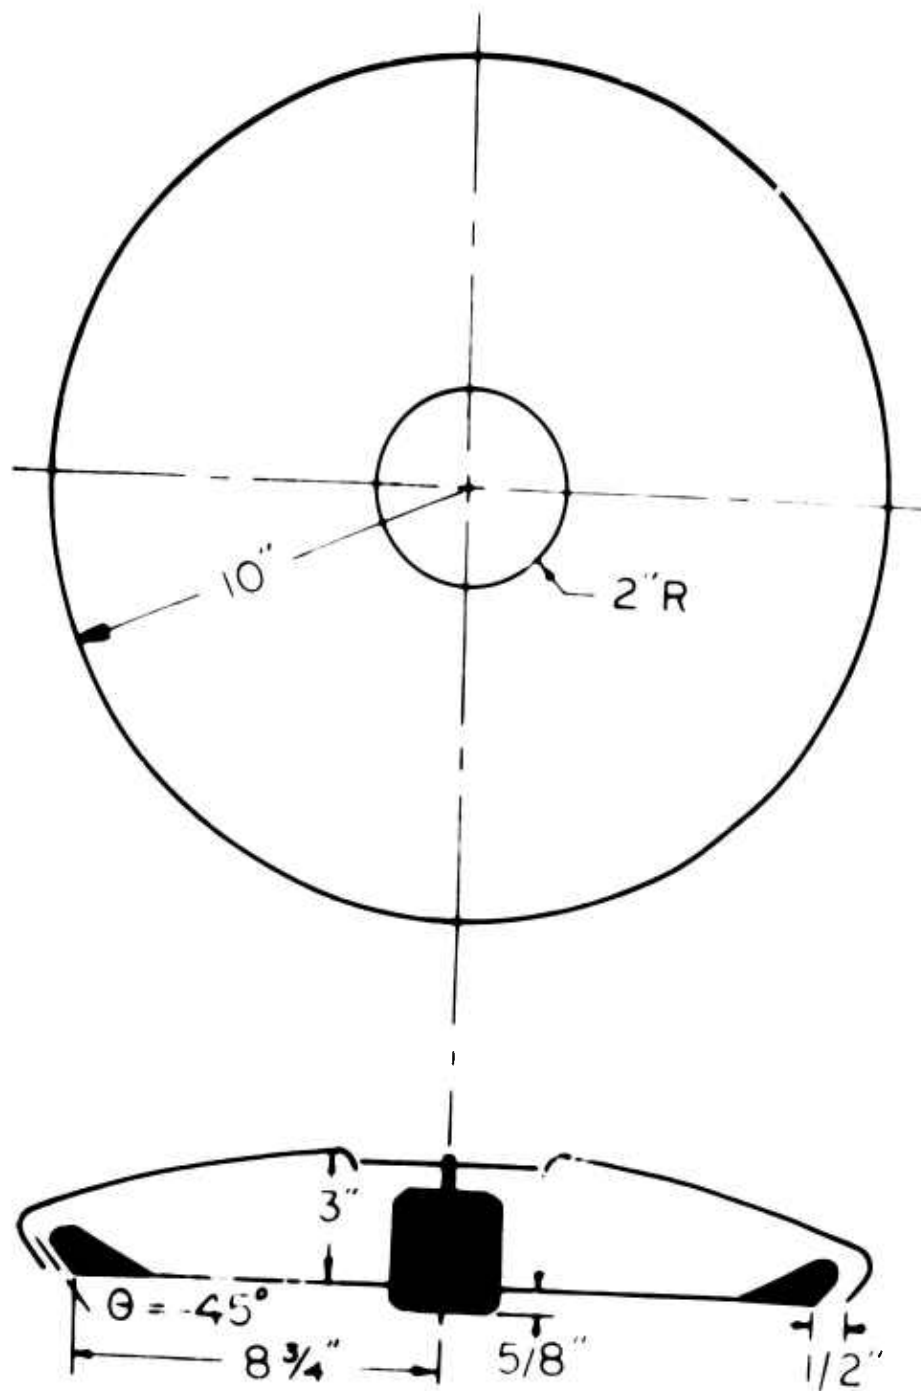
SCHEMATIC LAYOUT AND BASIC DIMENSIONS
